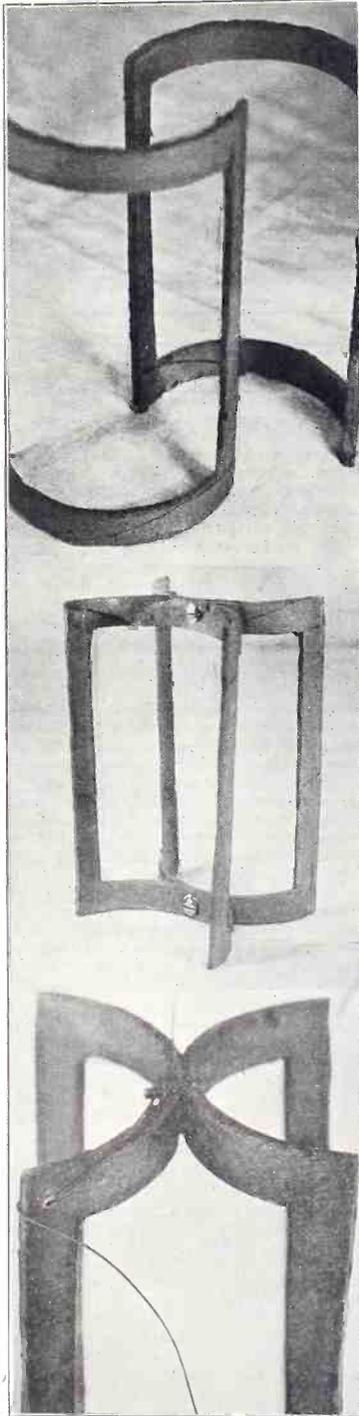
(top), the two pieces after the tubing has been cut. Fig. 7, reverse the halves and fasten together. Fig. 8, secure the magnet wire (No. 22 DSC) as shown.
